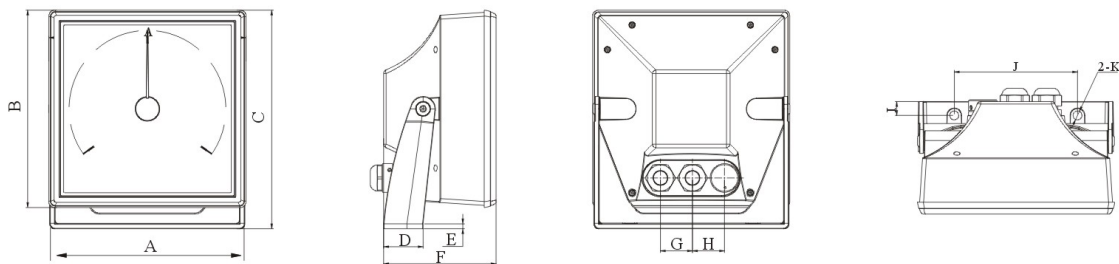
Dimension(Bridge Wing) 图2 壁挂式尺寸
